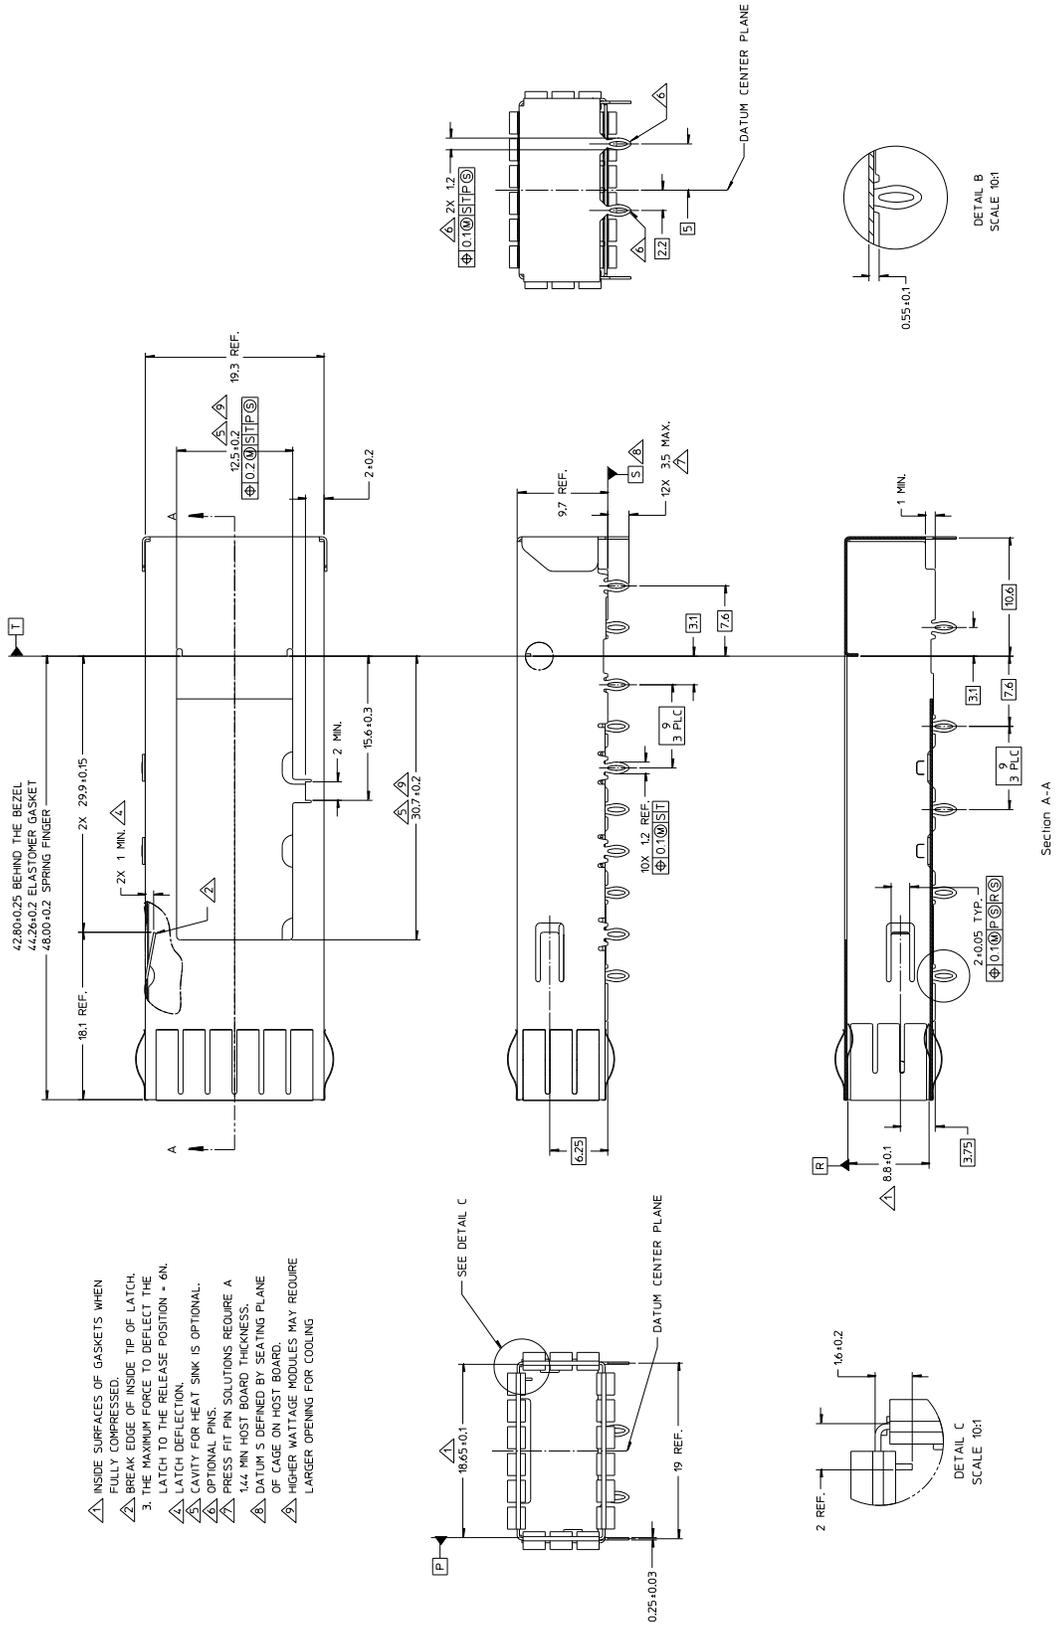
CAGE DIMENSIONS (1 OF 2)
